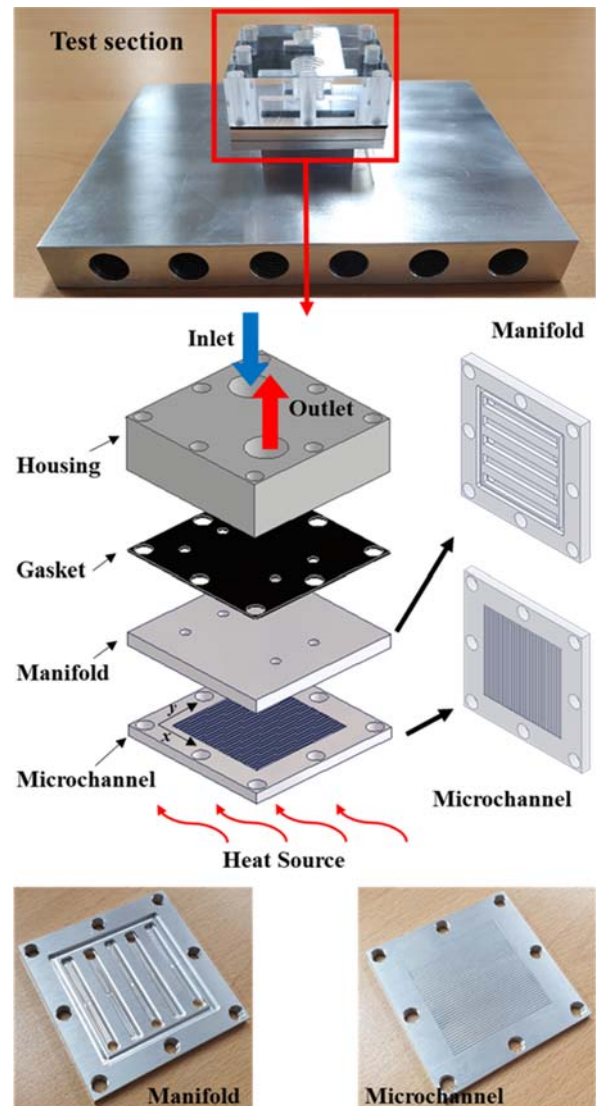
Exploded view of heatsink with microchannel and manifold distributor
